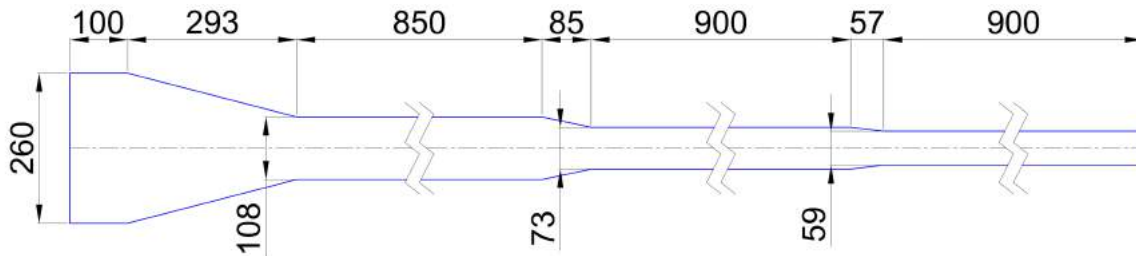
Bending stiffener geometry. The bending stiffener has a hollow core with a cross-sectional inner diameter of 38 millimetres (units: millimetres). (Courtesy of Waves4Power.)
